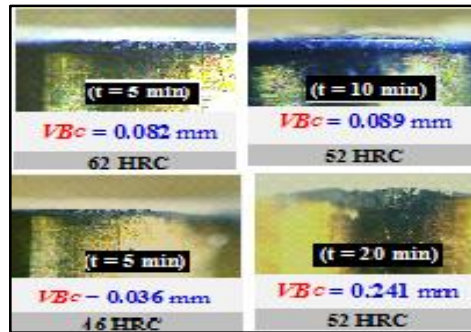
Tool flank wear morphology as a function machining time and workpiece hardness.
